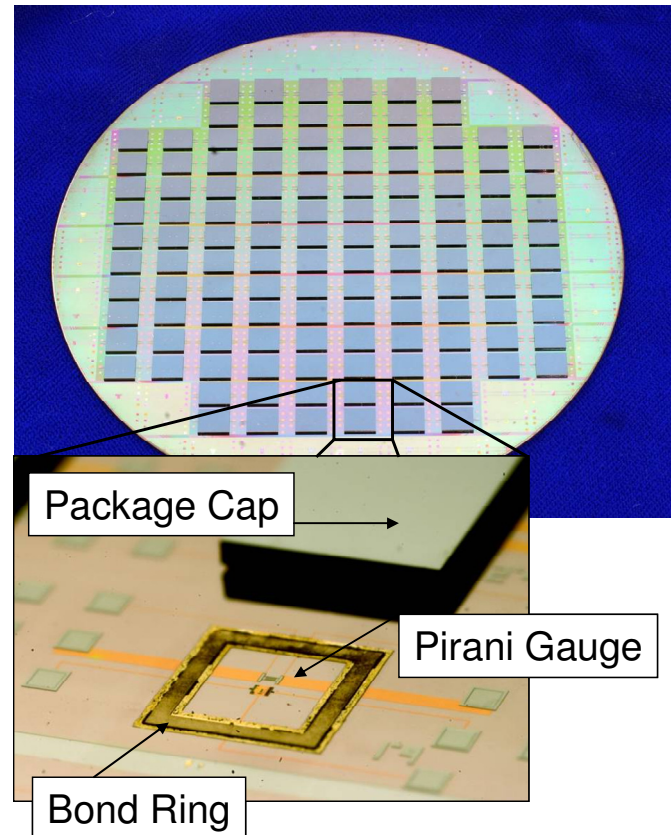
A completed wafer with a close-up of a de-capped die showcasing the Pirani gauge and bond ring.
